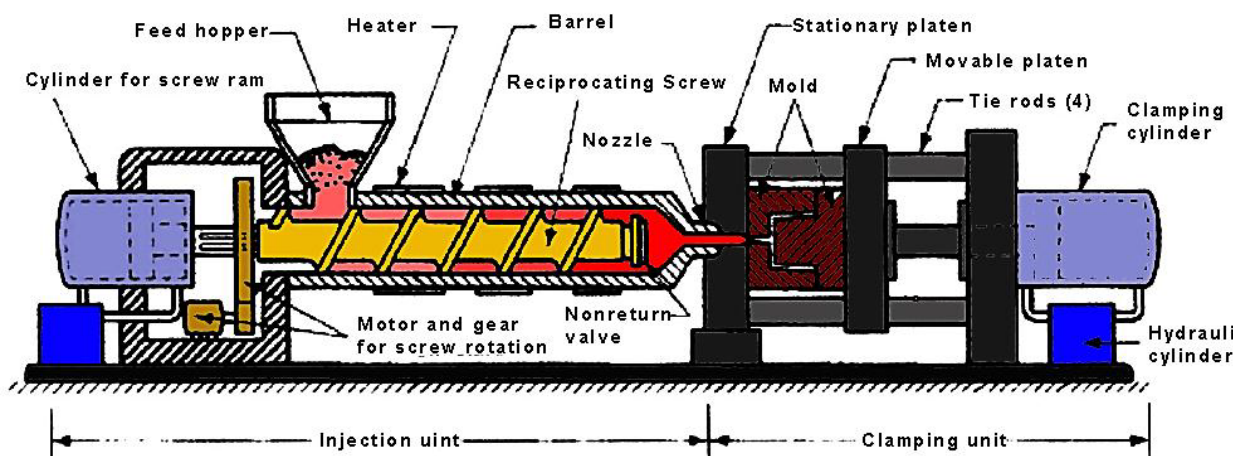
Typical Injection Molding Machine (Frizelle, 2011)
